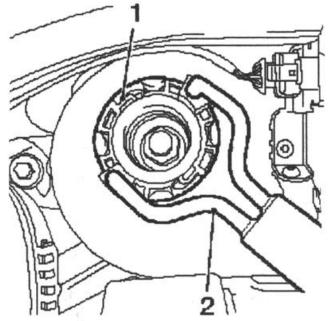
Puller for locking Rings: 1 - retaining rings, 2 - smnik
